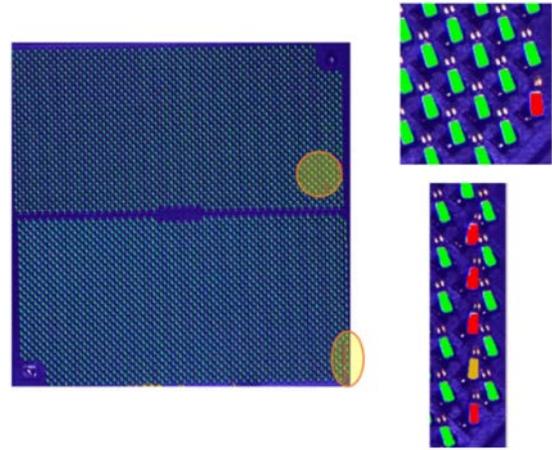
Example COBOT Inspection System Images of Good and Defective LGA Socket Contacts
